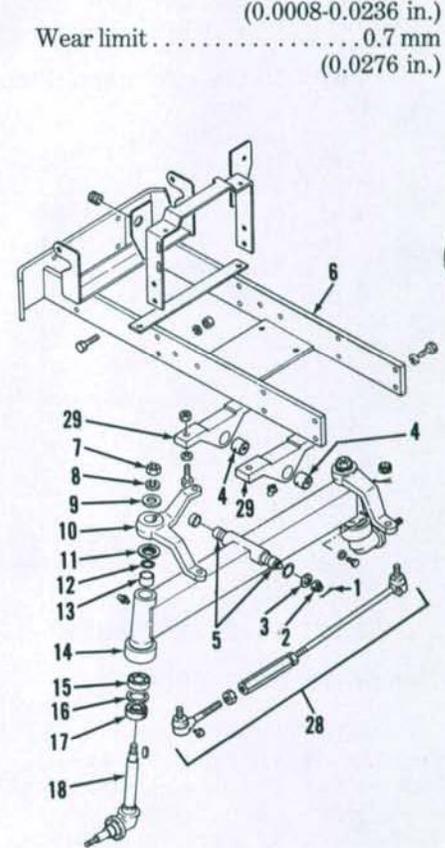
Exploded view of standard non-adjustable front axle used on some YM195 and YM240 models. Refer to Fig. 1 for wheel hub and bearings. Refer to Fig. 2A for optional adjustable axle and heavy duty axle.
